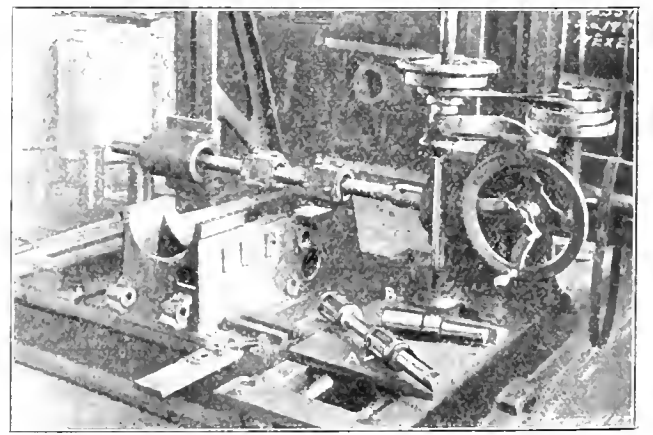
Boring and Reaming Main Bearings on a Standard Bed
